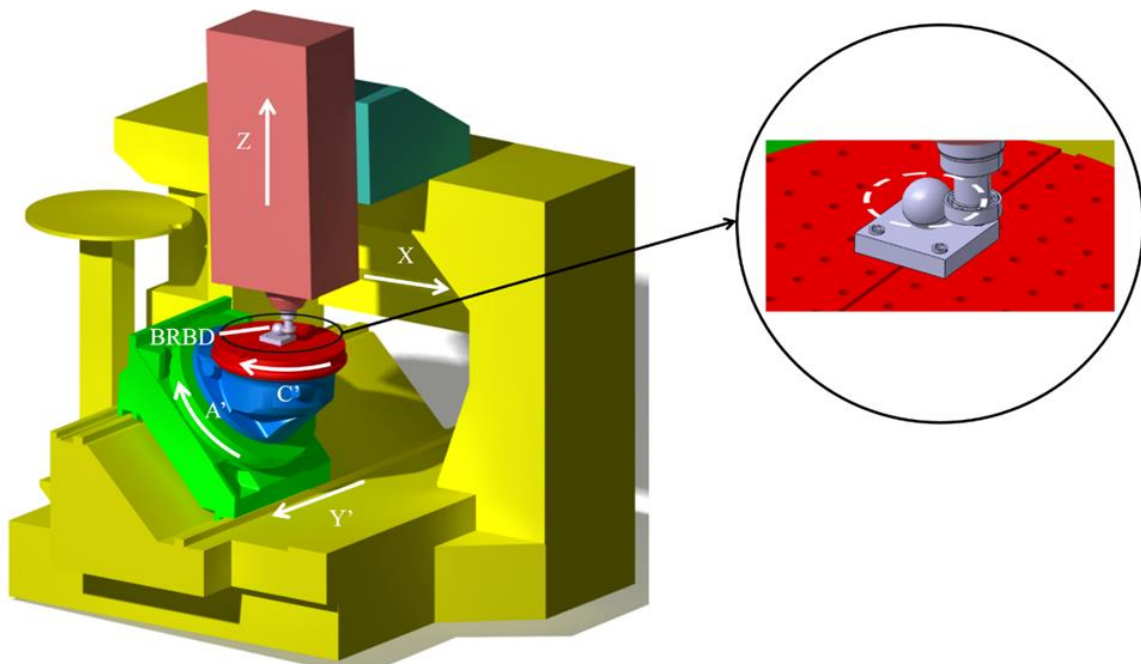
Huron KX8 five-axis vertical machine tool with BRBD mounted on it.
